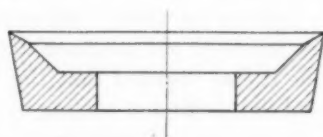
EXPERIMENTAL ROTARY LATHE TOOL
